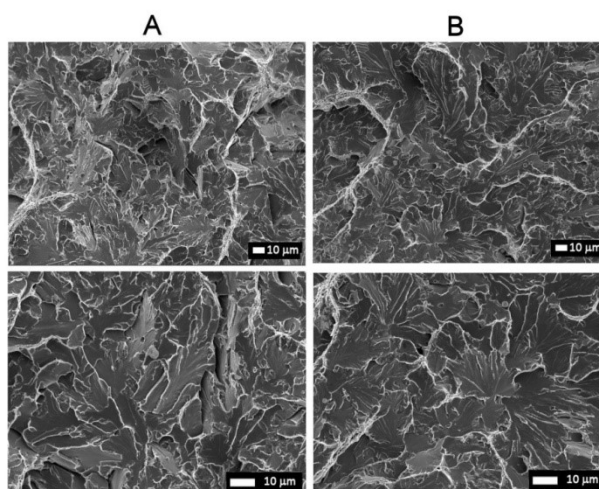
Morphology of fracture surfaces of non-modified cast steel A and modified cast steel B. Test temperature: -30°C
